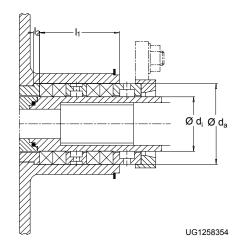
Dimensions of the packing chamber / Number of packing rings
